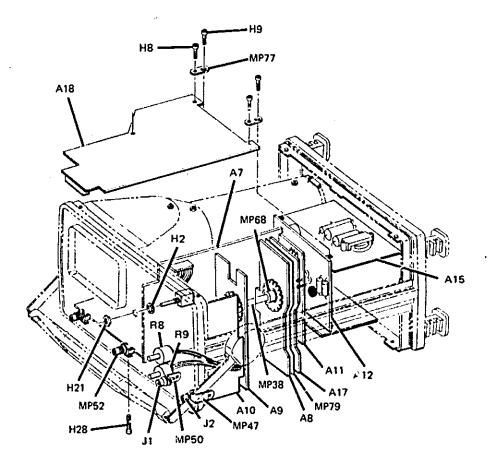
Chassis Parts and Board Assy Identification (Sheet 3 of 3)
